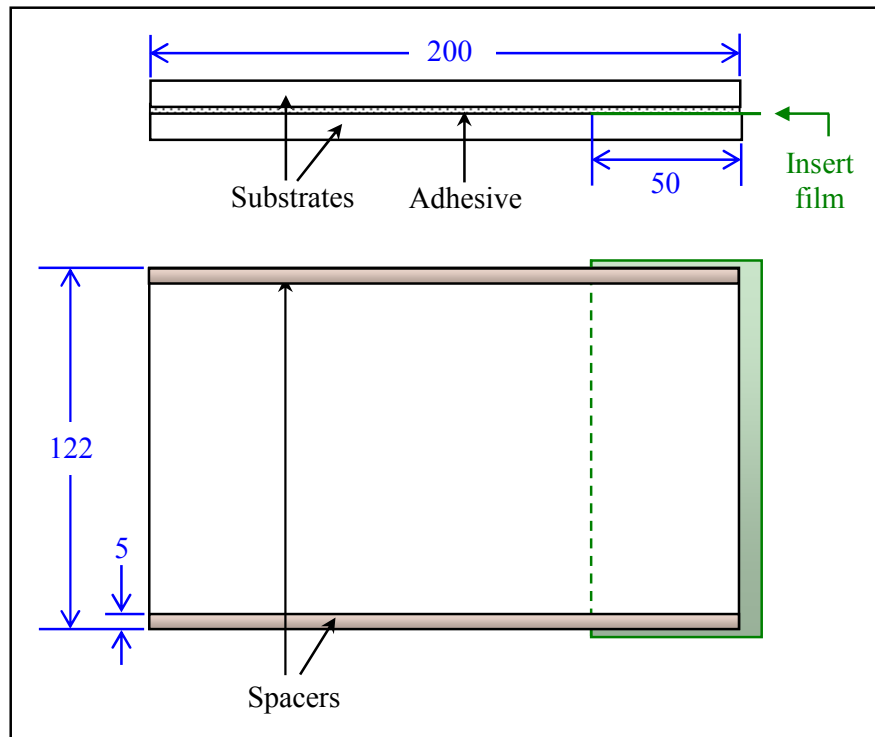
Panel layout for bonded aluminium alloy testing coupons (dimensions in mm)
